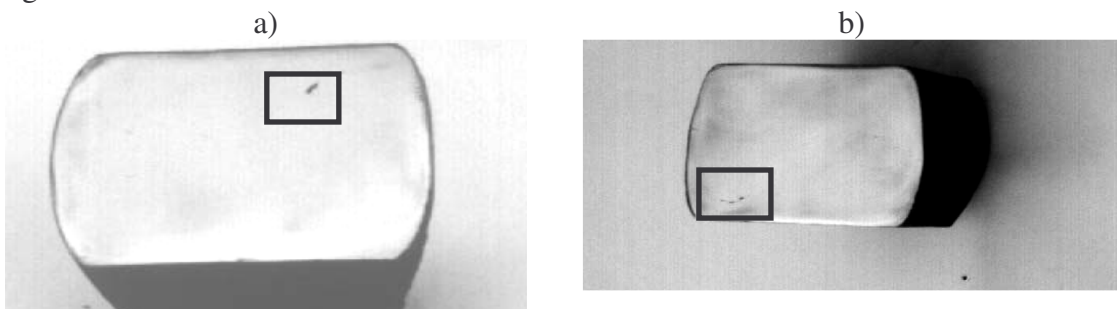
View of a microsection preforged and finishing forged on flat dies. a) cut at a distance of 1/3 of the forging length; b) cut at a distance of 1/2 of the forging length. Places with unclosed discontinuities are shown in boxes
